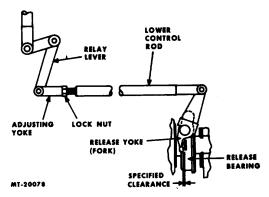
Release Bearing-to-Release Shaft Yoke Clearance (Pull Type Clutch)
